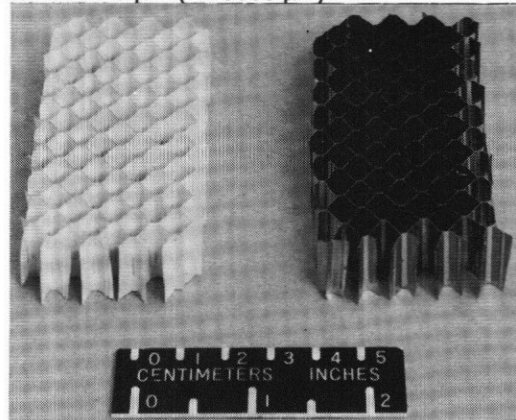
Tank plated honeycomb core before and after maskant removal.
